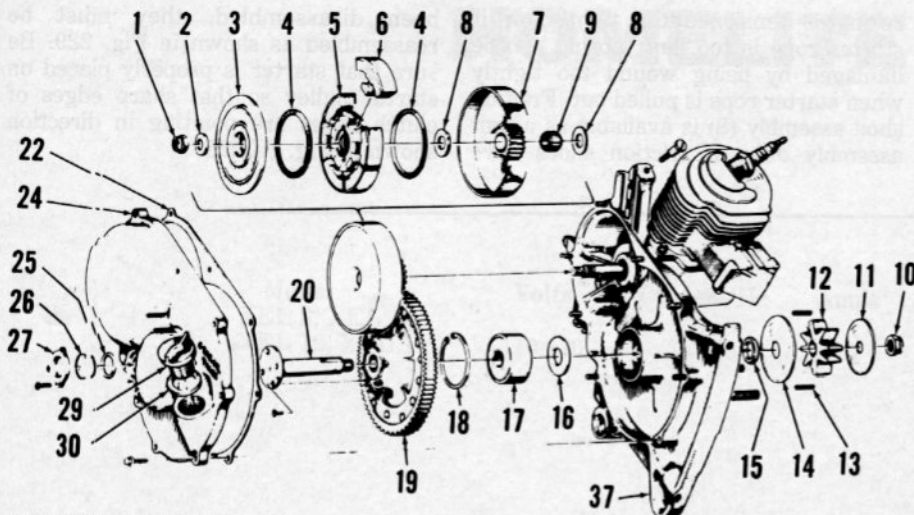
Exploded view of transmission. One standard and two optional gear ratios are available. Standard gear ratio of 3.57:1 is provided by output gear with 75 teeth and clutch drum with 21 teeth. Optional 2.84:1 ratio requires output (driven) gear with 71 teeth and clutch drum gear with 25 teeth. On 2:1 optional gear ratio, output gear has 64 teeth and clutch drum gear has 32 teeth.
